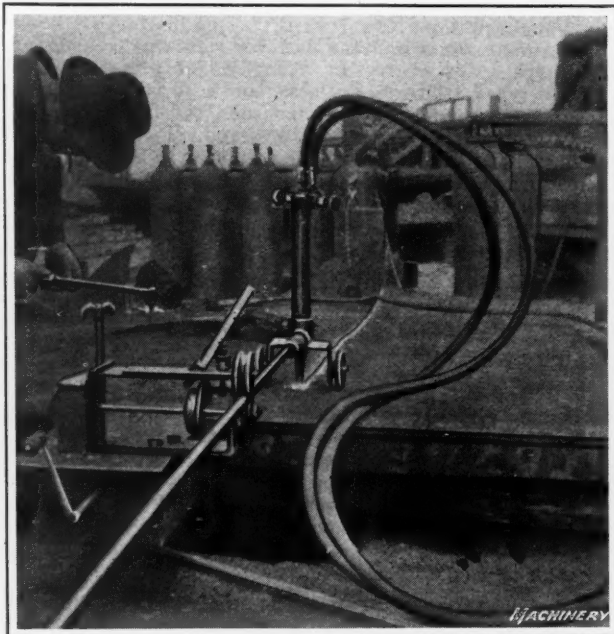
Illustration clearly showing Rollers and Knurled Pull-rod drawing Torch Carriage
